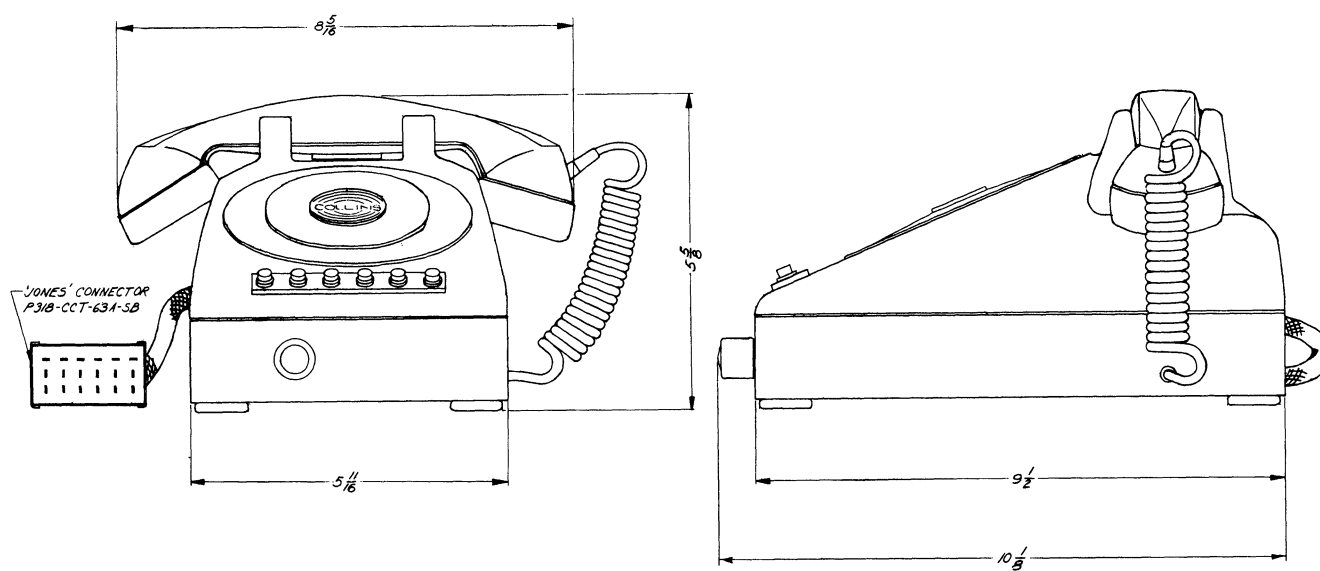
Control Unit 48A1-SW, Outline and Mounting Dimensions
